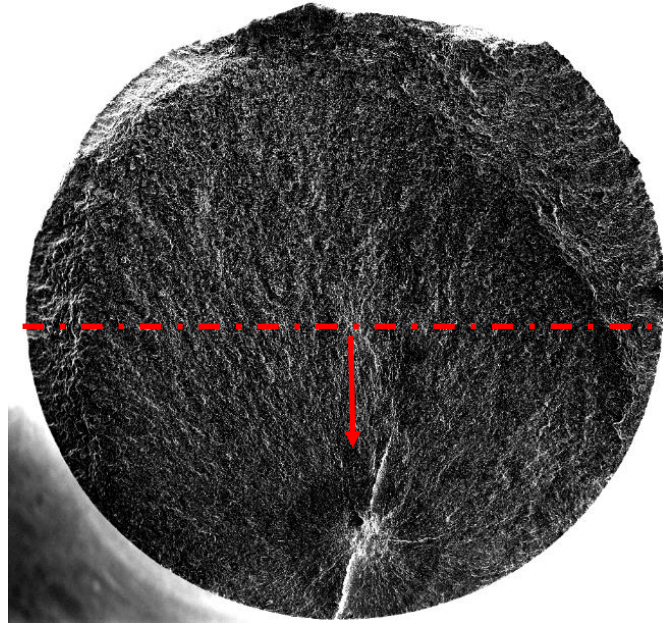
Schematic view of the sectioning and grinding process in order to view crystal orientation from the transverse view. This is a Ti-407 forged pancake fracture surface.
